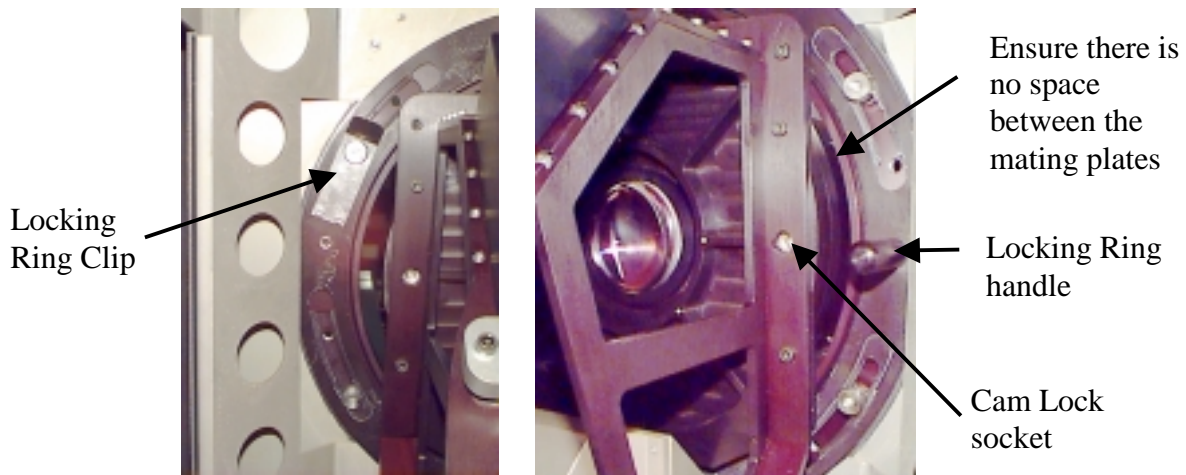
Left and right side of Arc Lamp Module after attachment to Projection Module.
